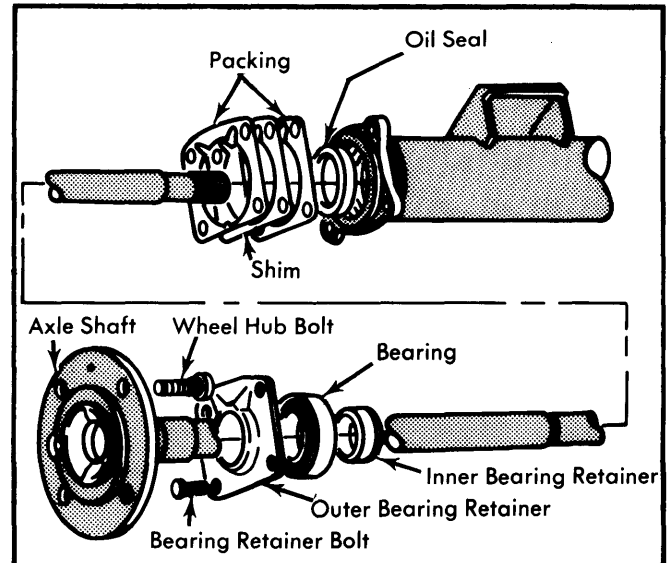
Exploded View of Axle Shaft Assembly (Passenger Car Models)
